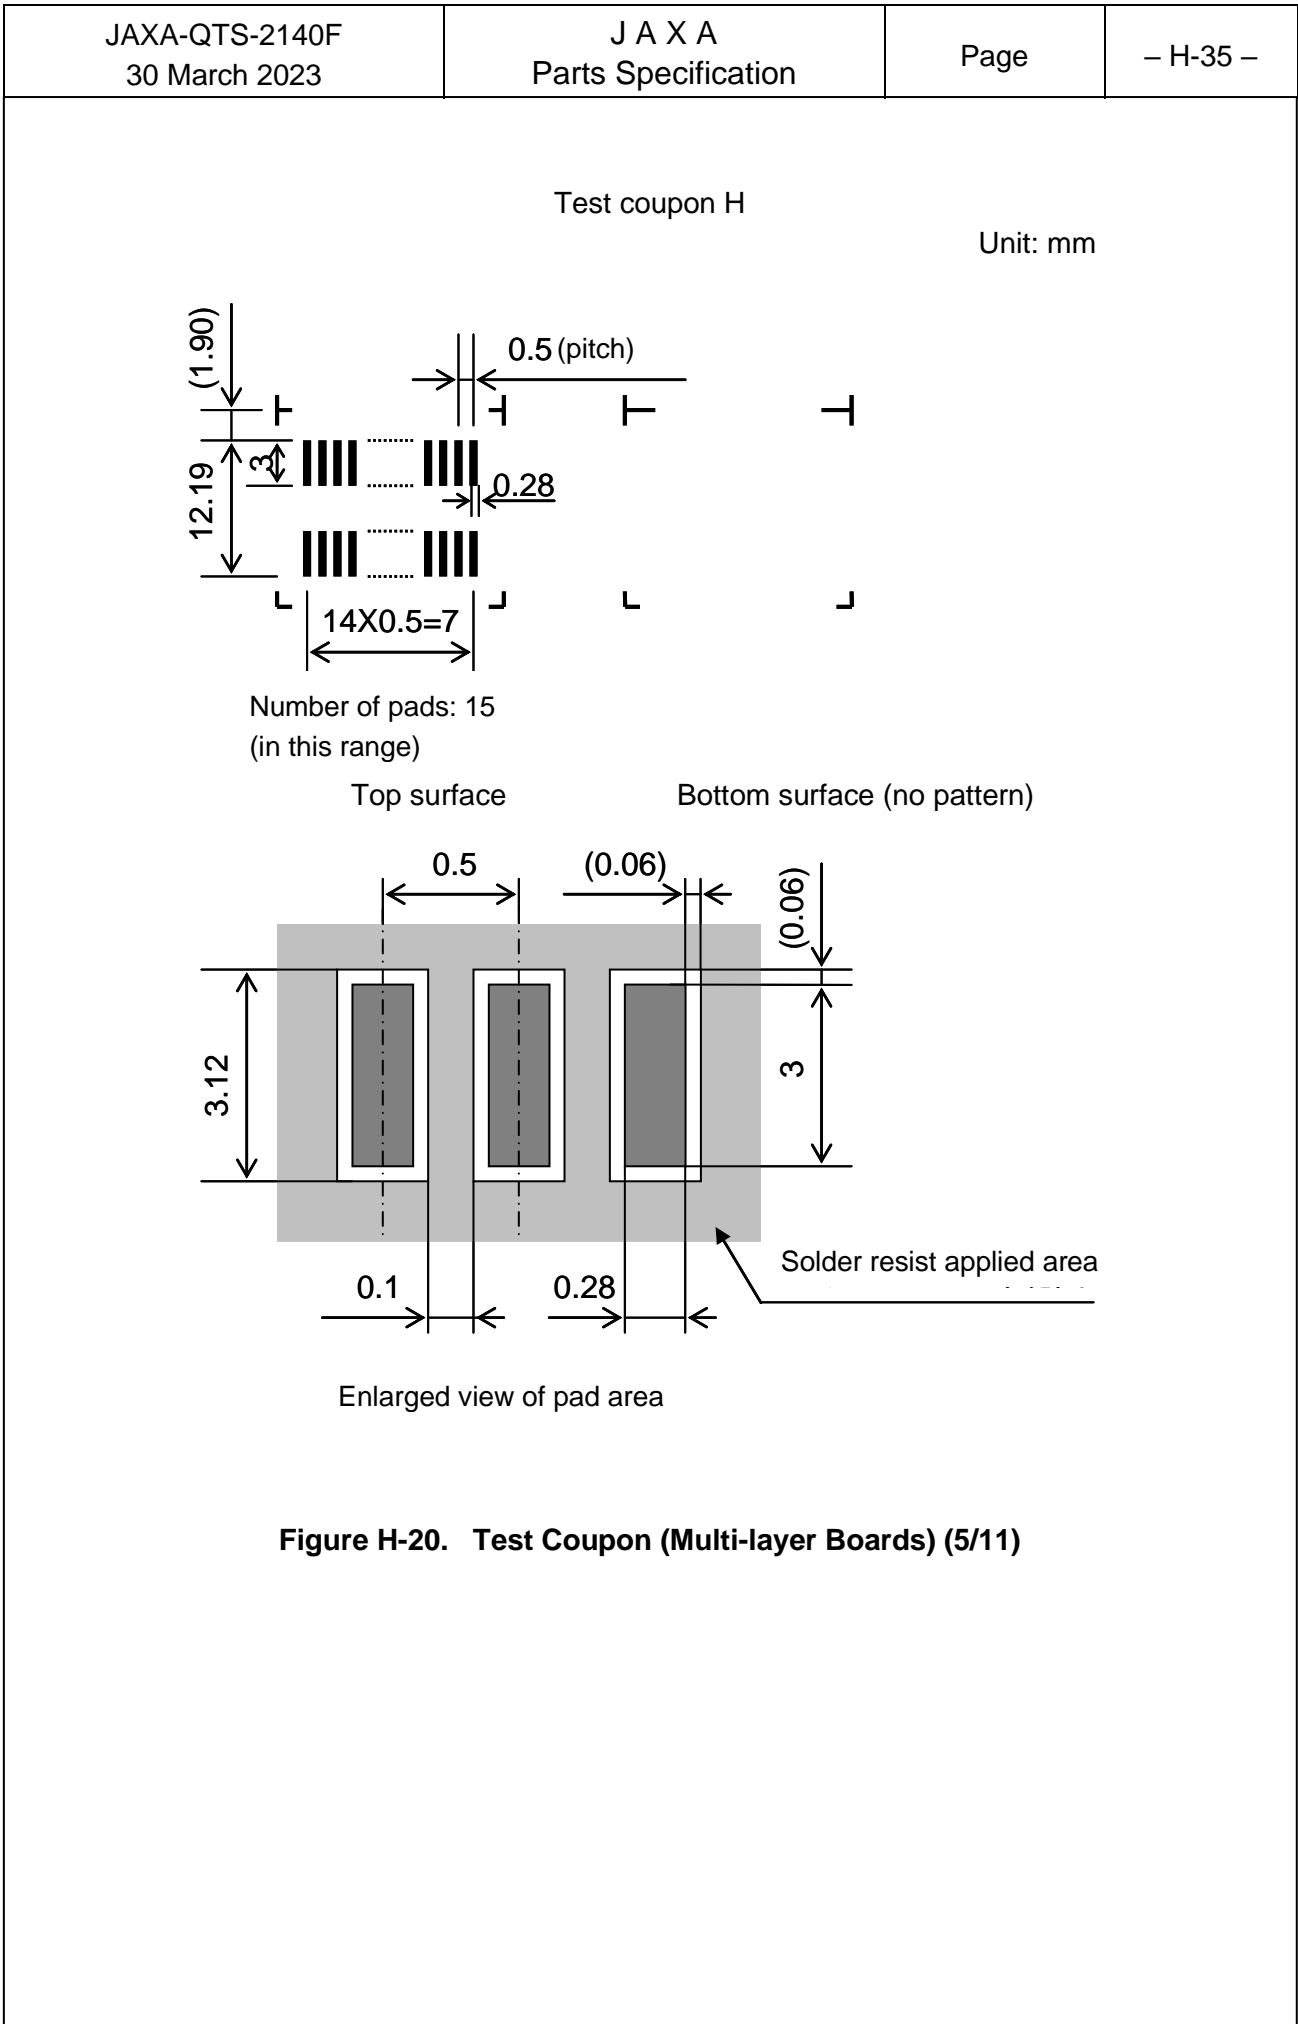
Test Coupon (Multi-layer Boards) (5/11)
